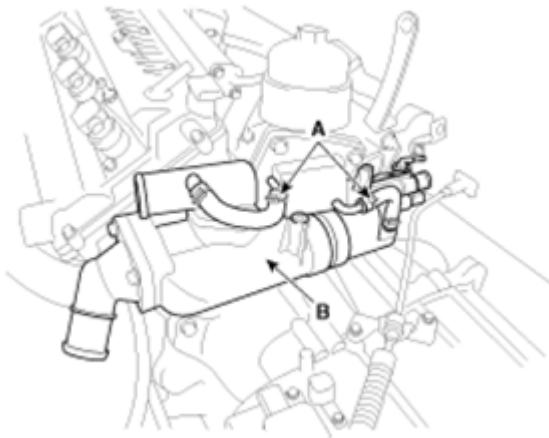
Identifying Water Temperature Control Assembly With Oil Cooler Hoses
